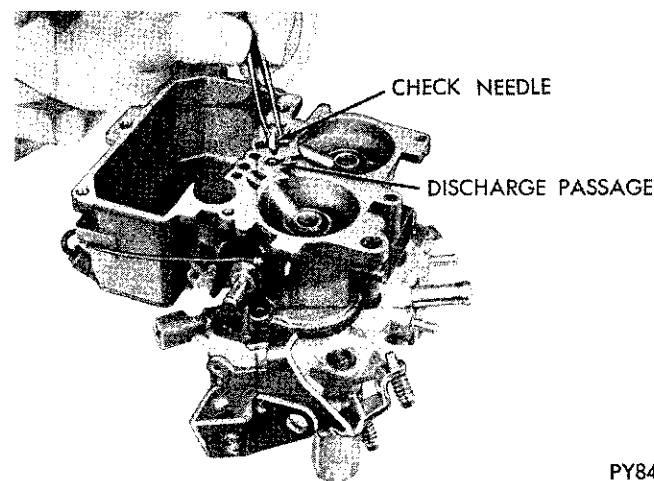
Installing Accelerator Pump Discharge Check Needle
